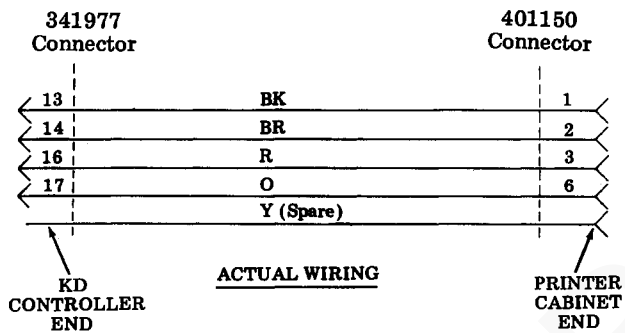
341895 Printer Extension Cable Assembly (SSI)
